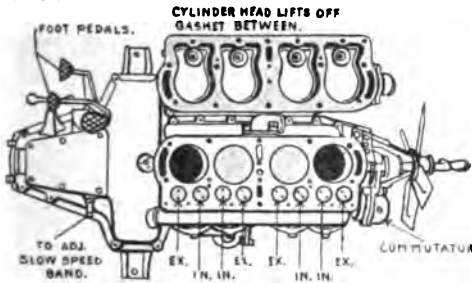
Top view. Cylinder head removed showing cylinder bores, pistons and heads of valves in their seat. Note which are exhaust and which are inlet valves.
